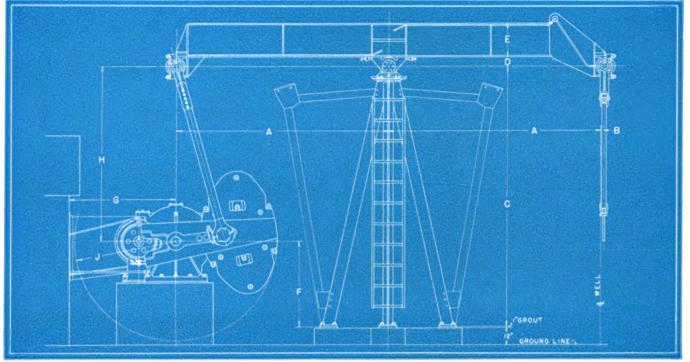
Lufkin Single Crank Unit Assembly—Crank Clearing Ground GENERAL DIMENSIONS
